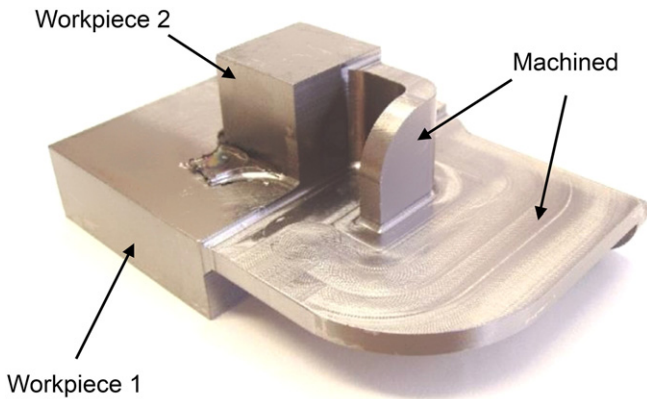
Fabrication of a titanium alloy (Ti–6Al–4V) preform using the LFW process. The as-welded structure can be seen on the left side of the figure and the final machined component on the right. Courtesy of TWI [11].
